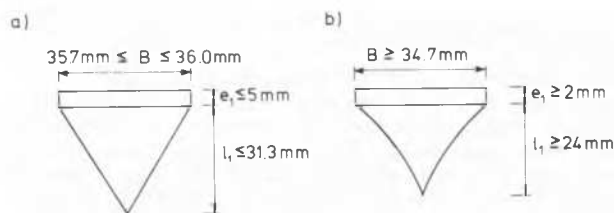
Manufacturing (a) and operating (b) tolerances of the recommended standard cone.
